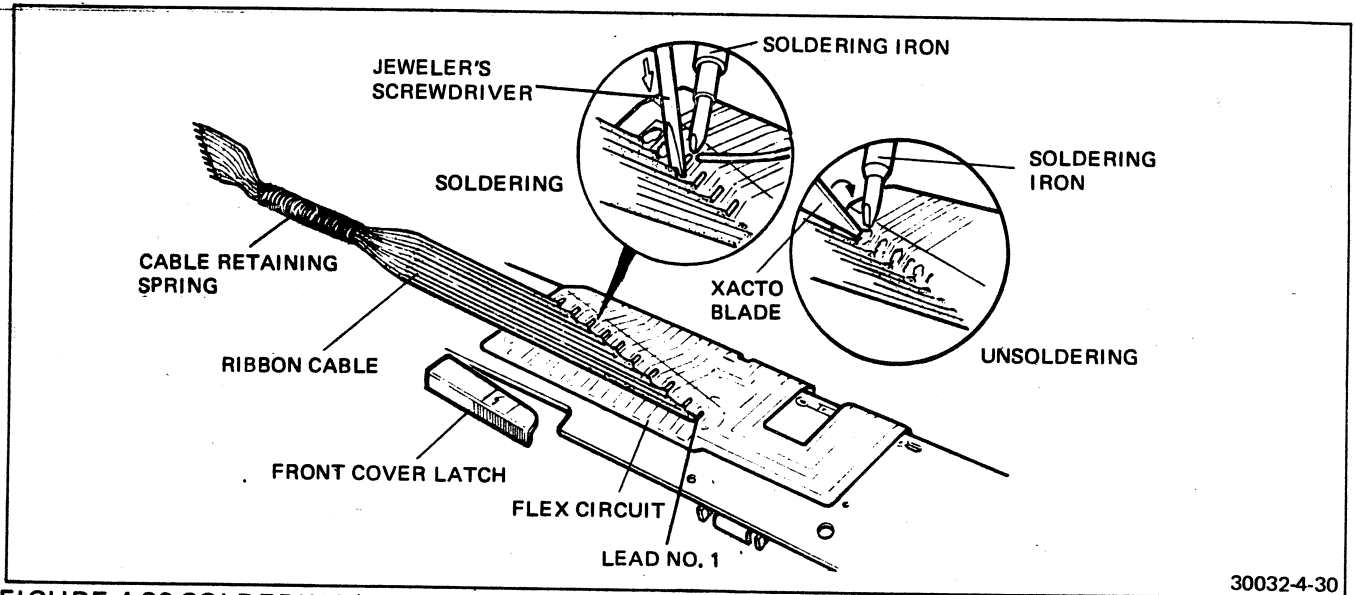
SOLDERING/UNSOLDERING RIBBON CABLE
